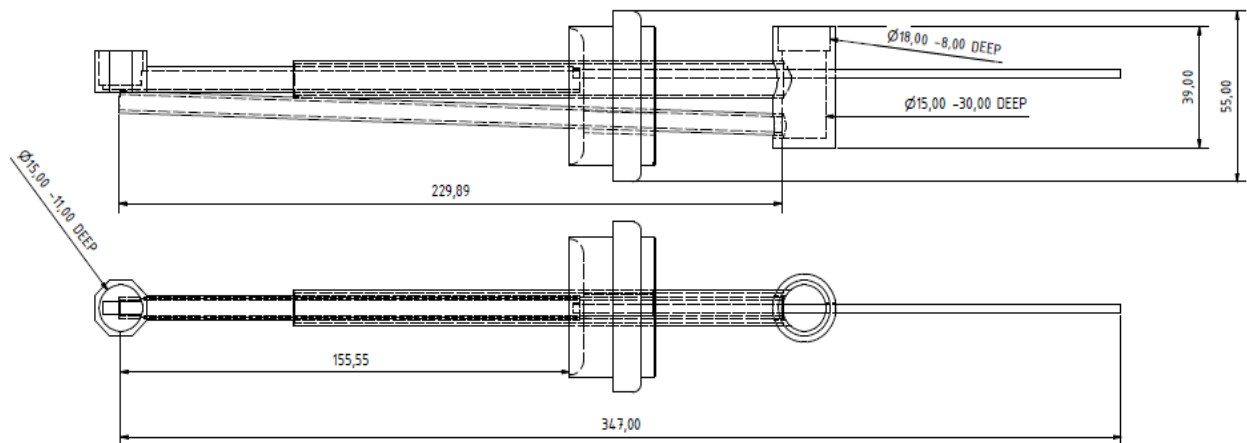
TOP- AND SIDE SECTION VIEW OF LIQUID SAMPLE PORT
